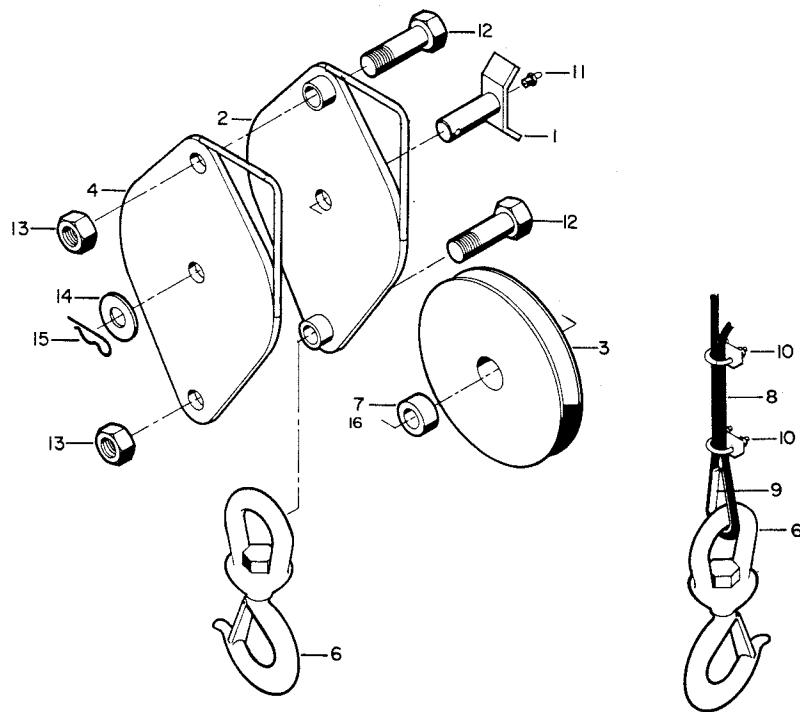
Winch / Cable / Hook Kit - Gear Products Winch (Part Number 41707648)
